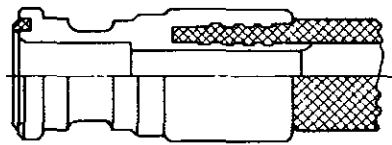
Non-Reusable Swaged or Crimped Hose Fitting
